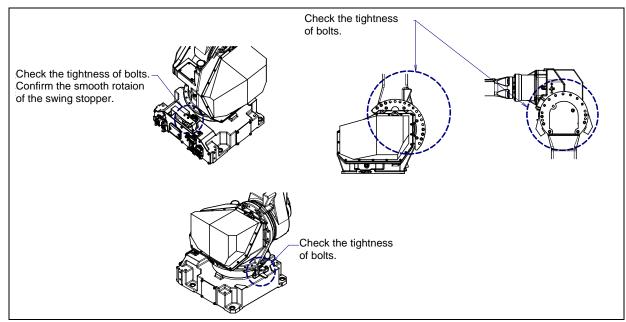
Check of fixed mechanical stopper and adjustable mechanical stopper
